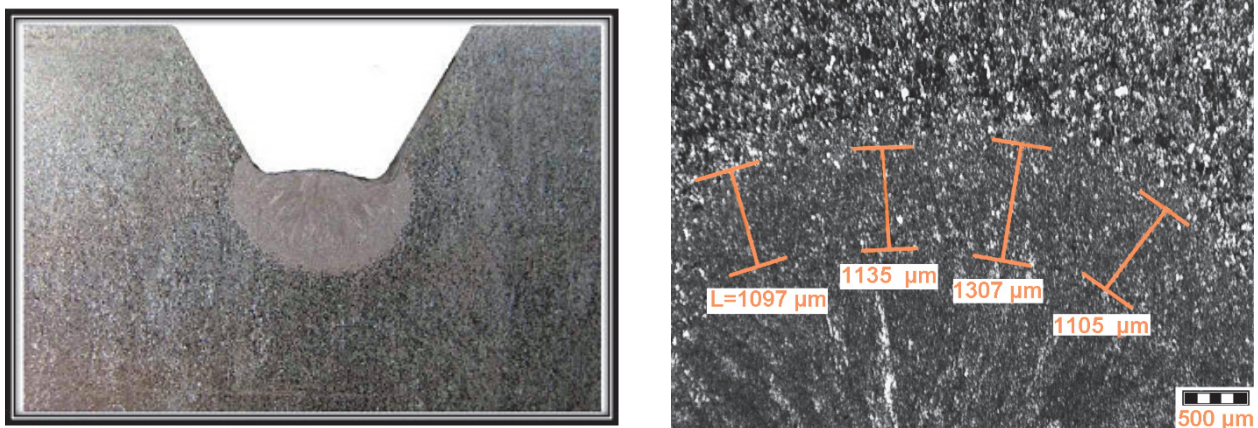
Example of heat-affected zone width measurement, welding method 111, electrode Ø3.2 mm
